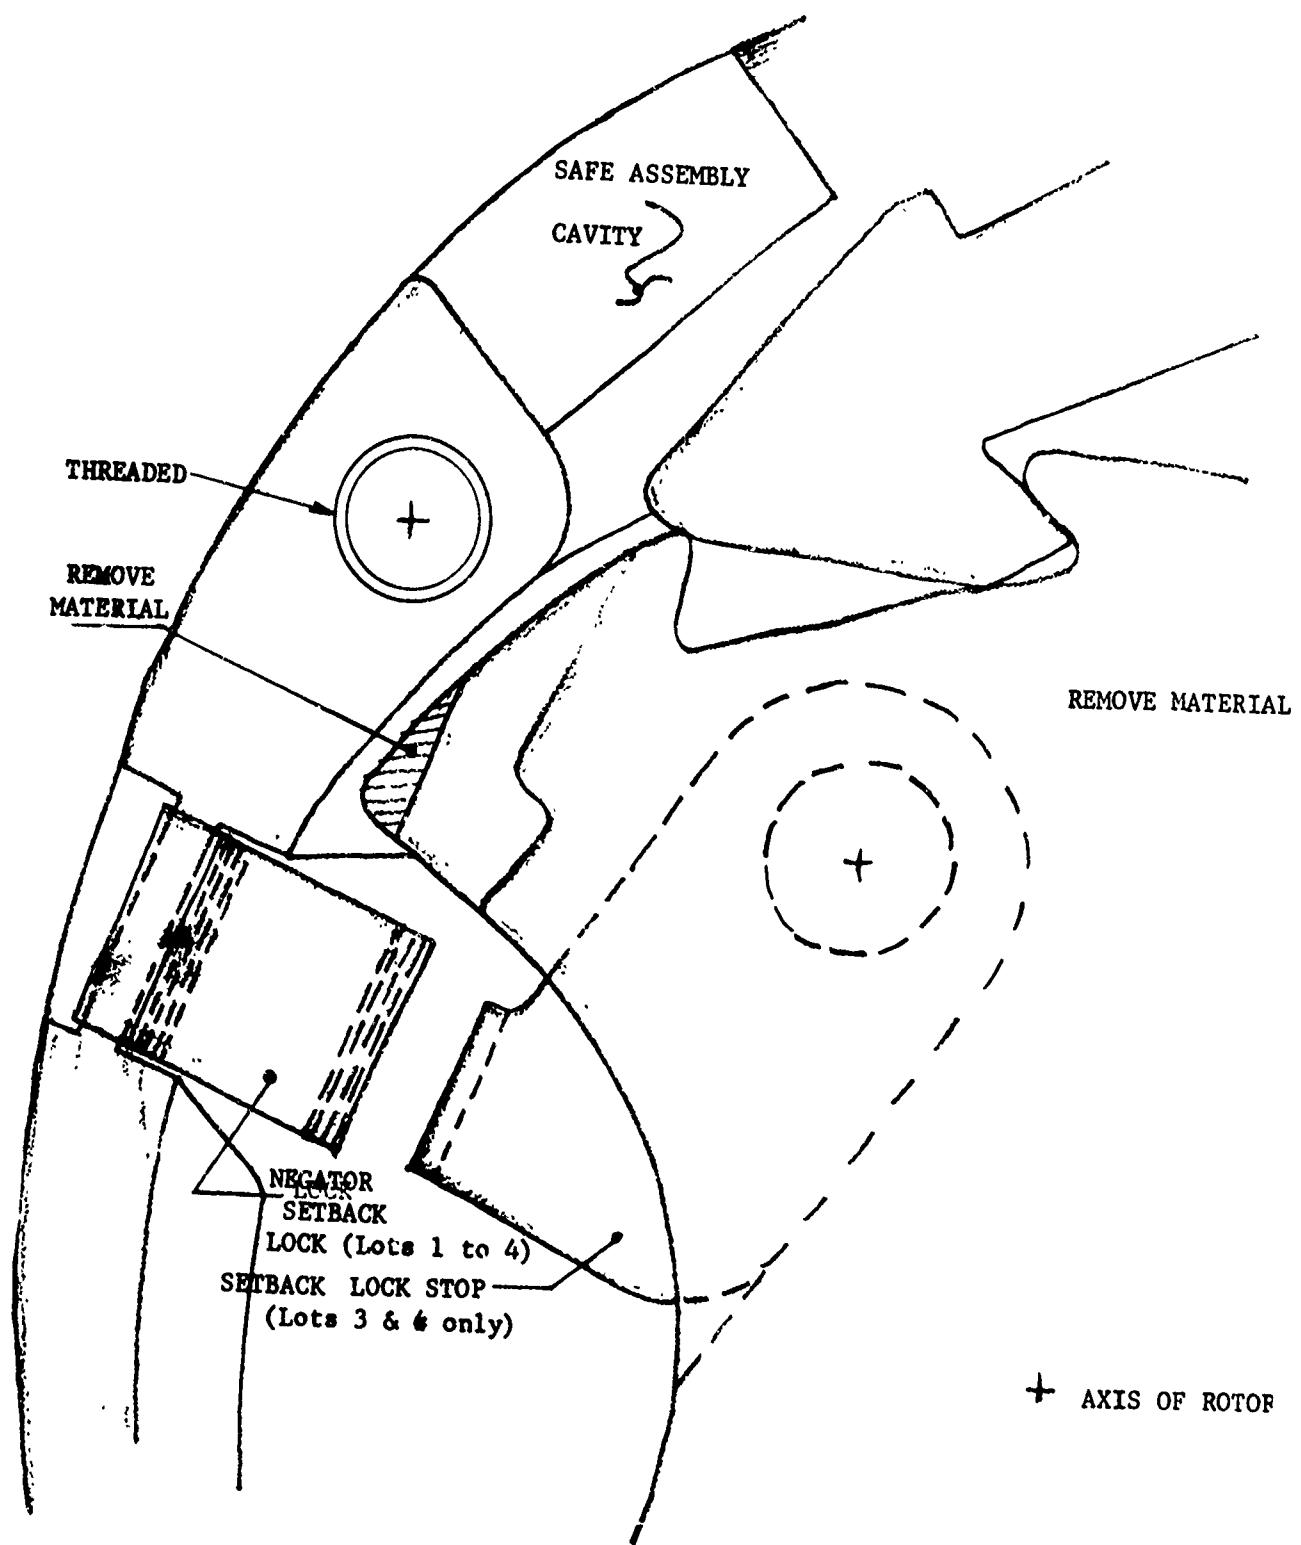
SETBACK LOCK DETAIL - ROTOR IN SAFE POSITION
